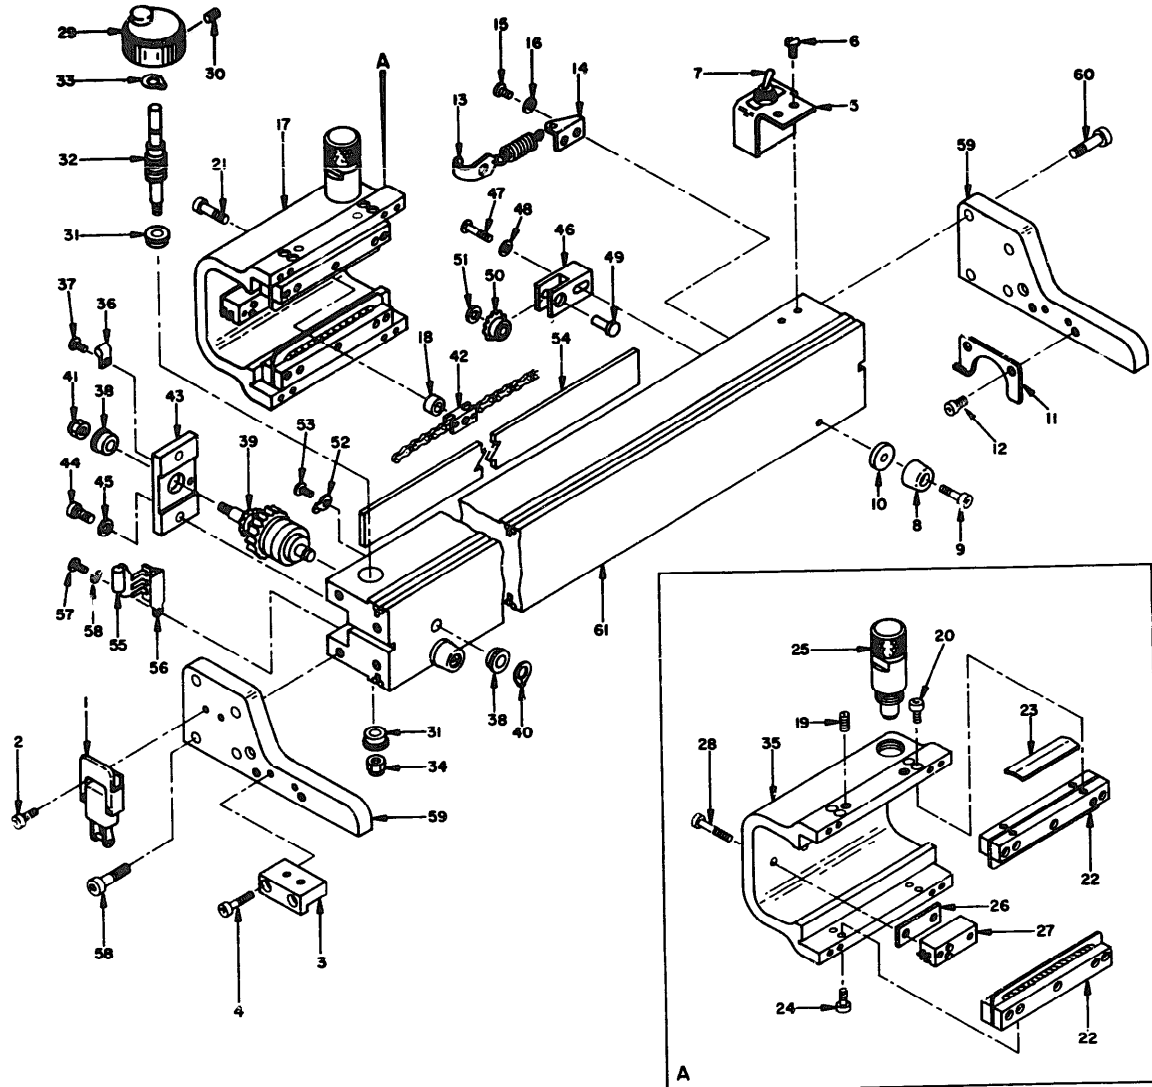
Removal and separation of carriage assembly, exploded view.
